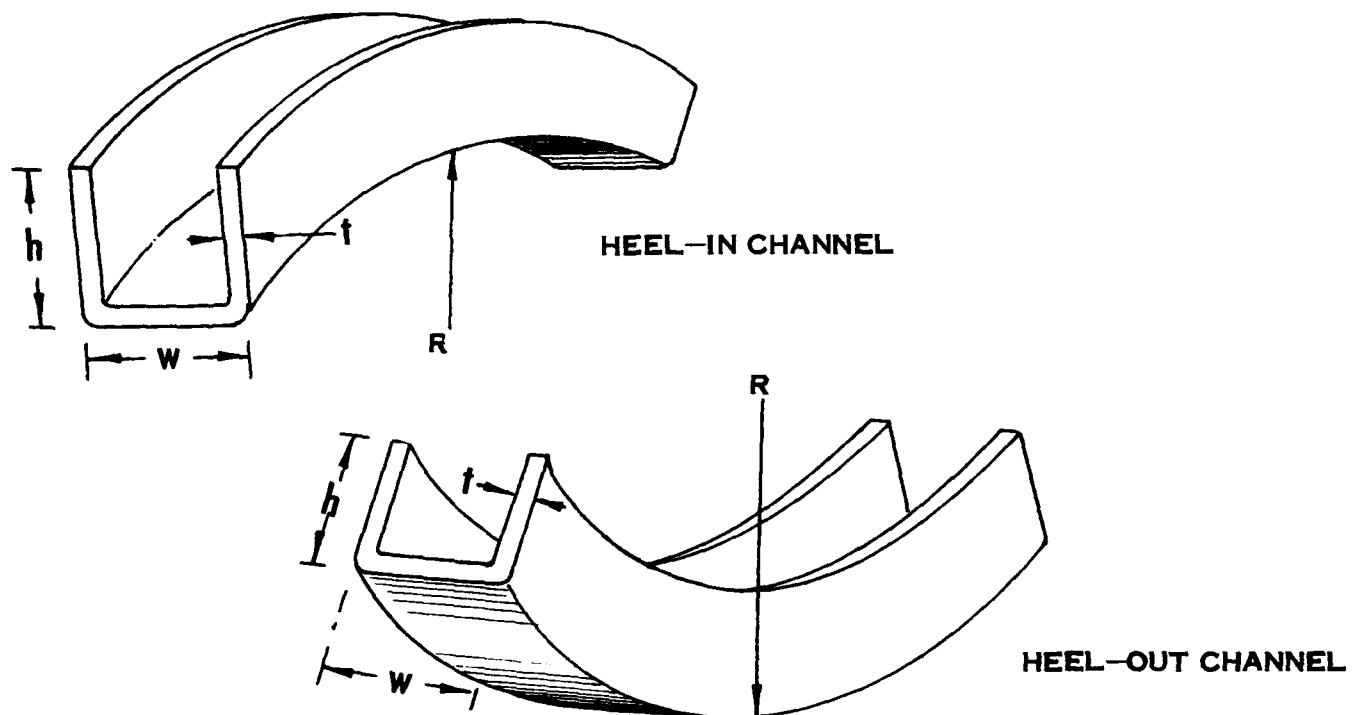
LINEAR ROLL HEEL-IN AND HEEL-OUT CHANNELS
